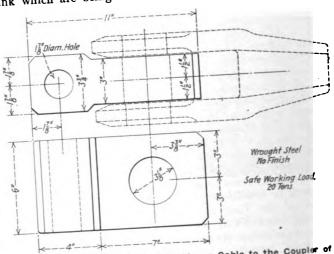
Drawing of Link for Attaching a Cable to the Coupler of a
